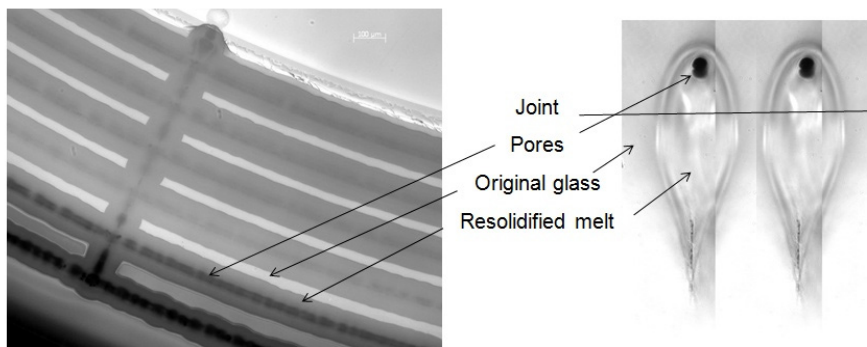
(a) weld seams from above; (b) melt balloons cross section.
